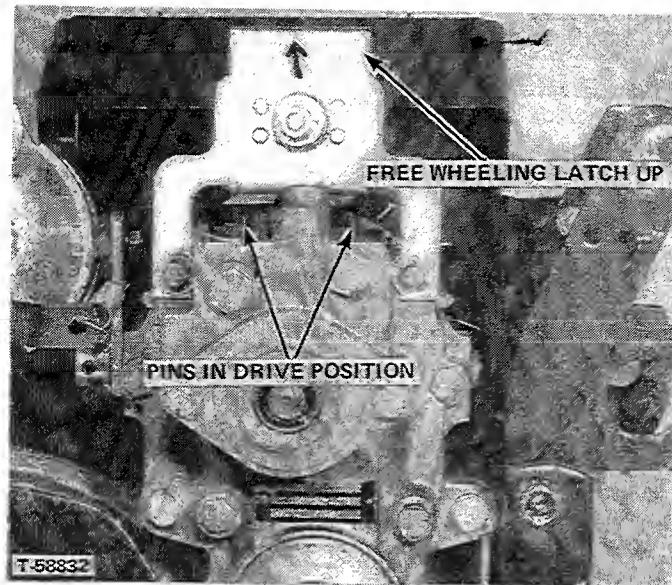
(Seat, Deck and L.H. Wheel Removed)
